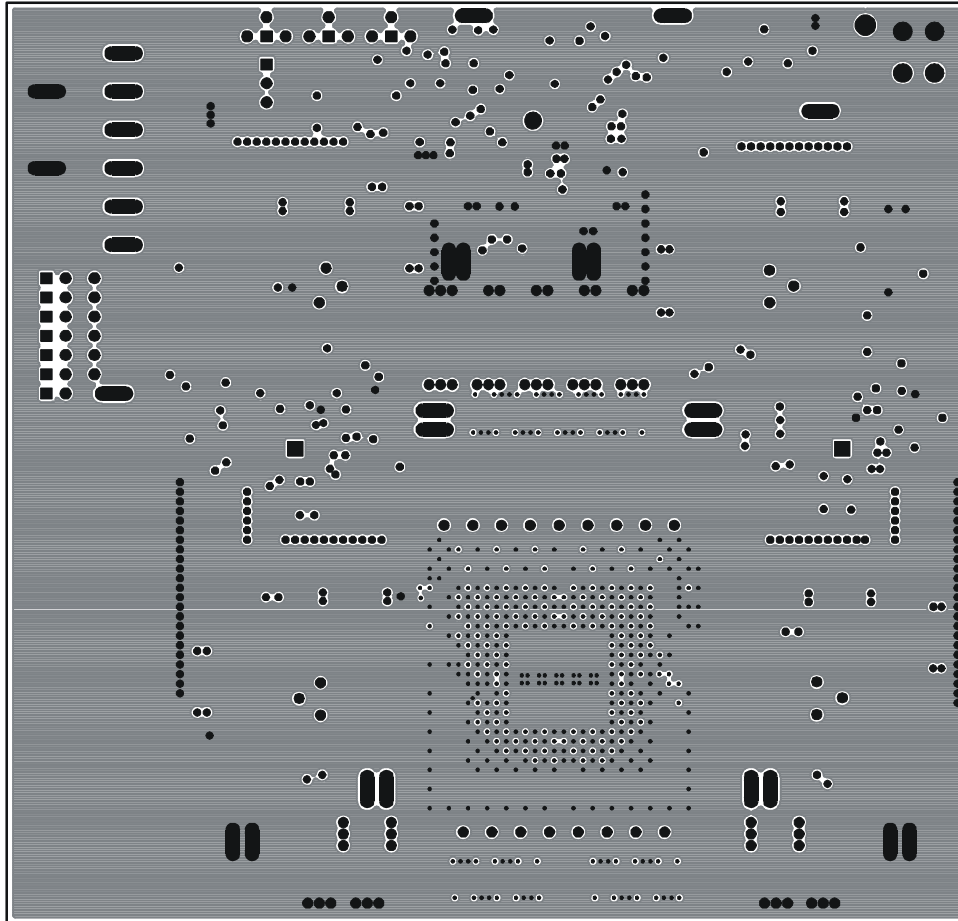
MAX1544/MAX1545 EV Kit PC Board Layout – Layer 7
